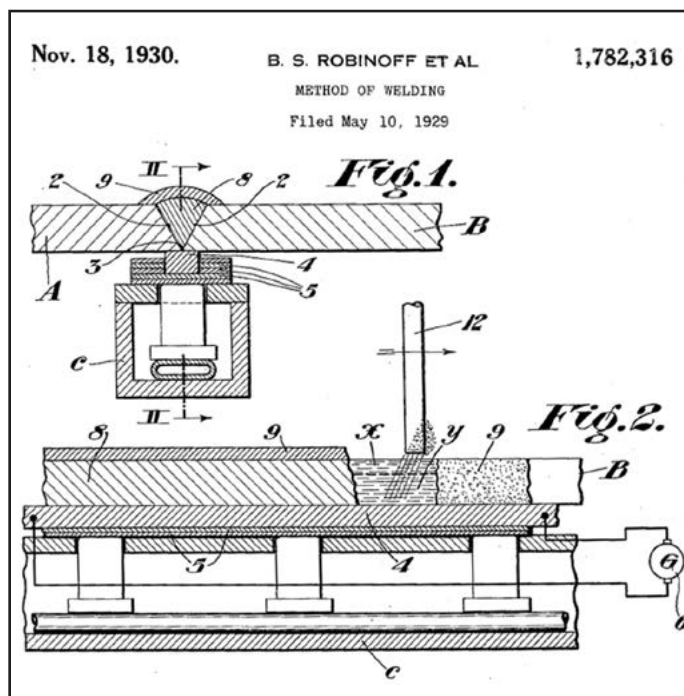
Scheme of welding under a flux layer according to US patent no. 1,782,316 [10]
